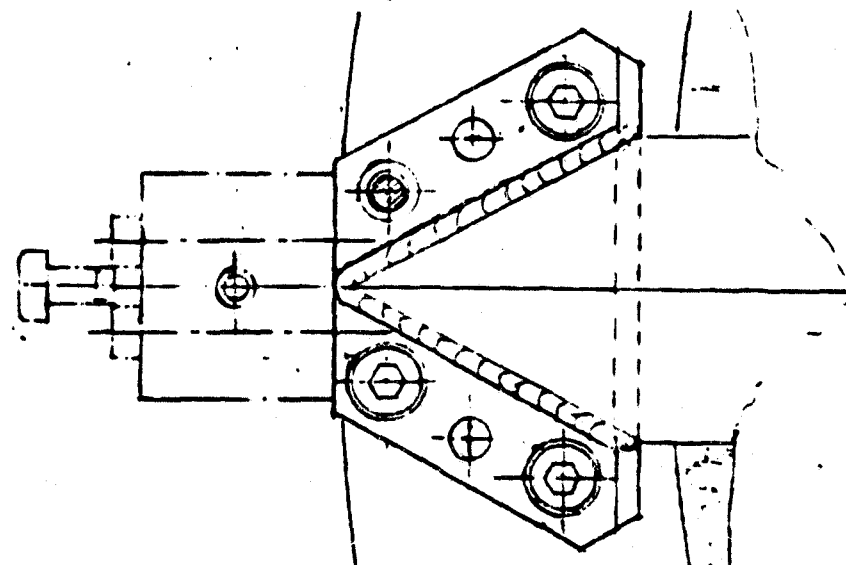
/9: Construction draft for the adjustment device at the tripod.
